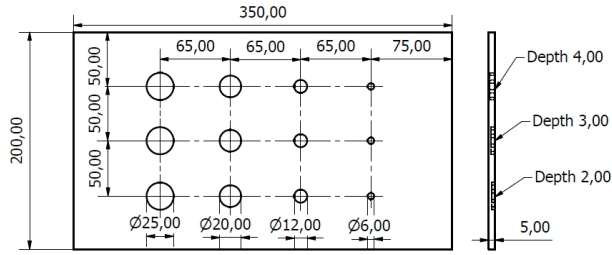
Technical drawing of the Flat Bottom Hole plate.
